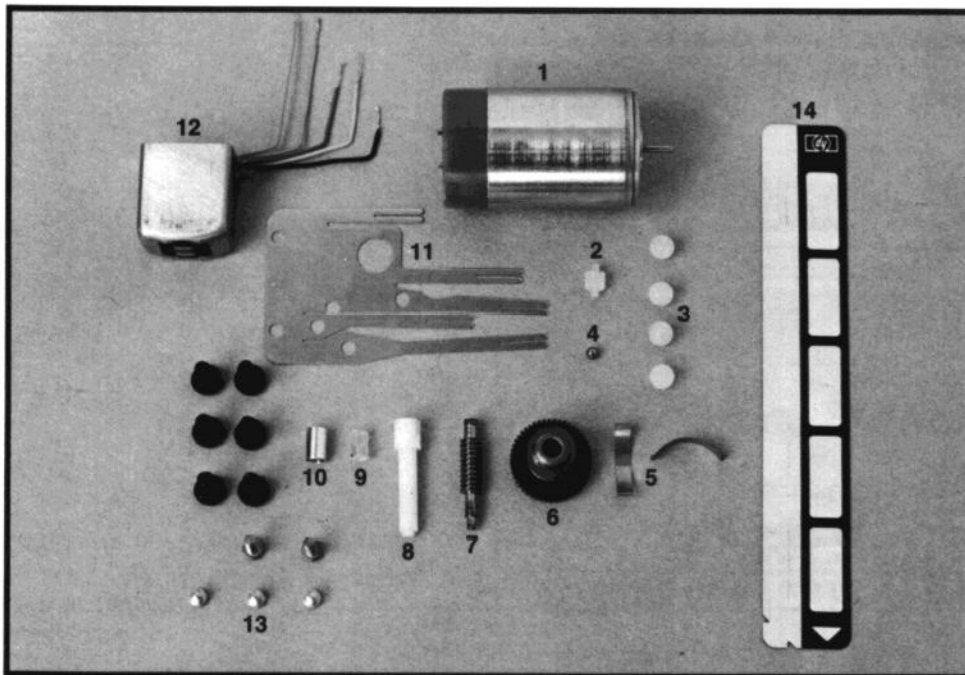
HP-65 card reader parts: 1. Motor 2. Idler roller 3. Switch activation balls 4. Thrust ball bearing 5. Card side loading springs 6. Rubber drive roller and helical gear 7. Worm gear 8. Drive pin 9. Coupler 10. Coupler sleeve 11. Switch contacts 12. Read/write head 13. Self-tapping switch adjustment screws 14. Magnetic card, 7.1 cm by 1 cm.
